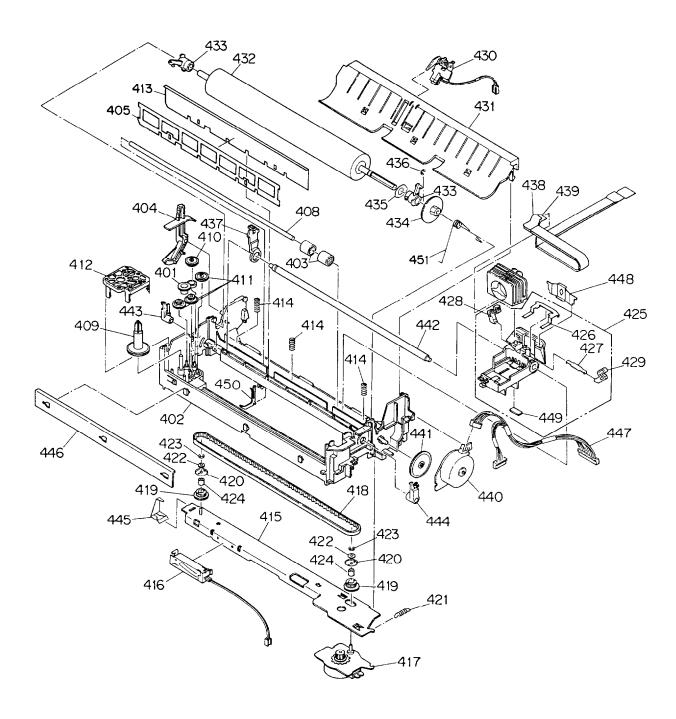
M-5C10 Printer Mechanism Exploded Diagram
